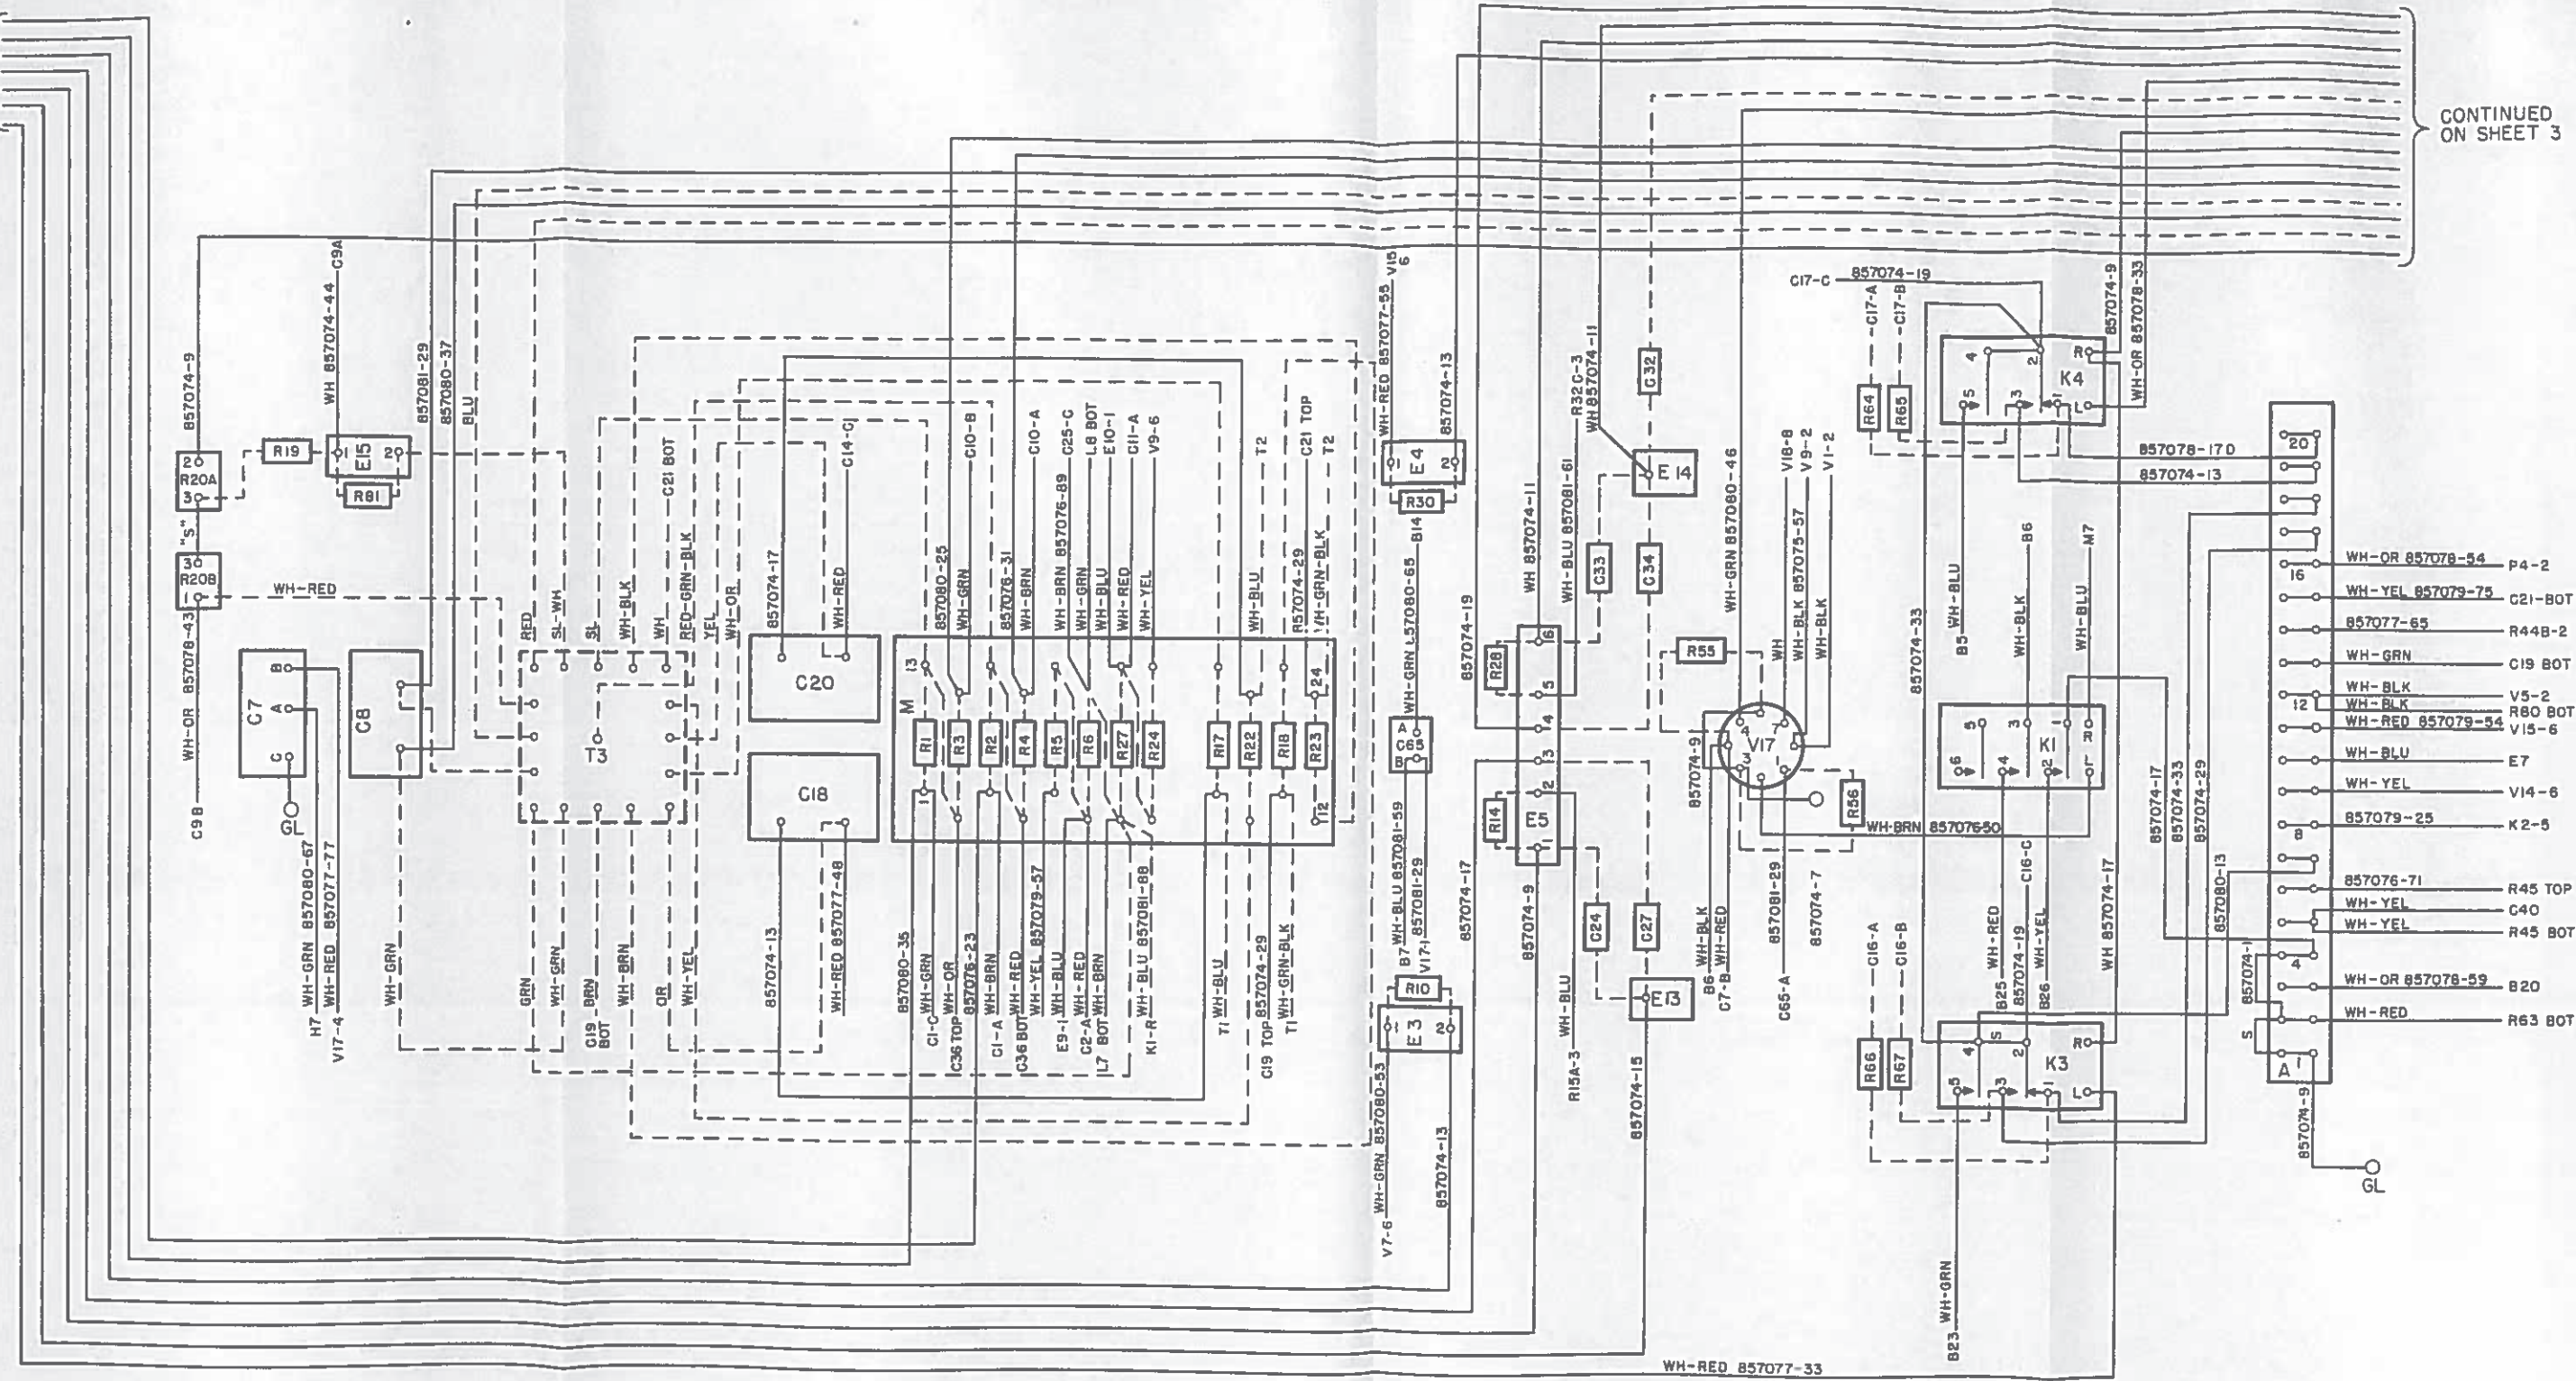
Control Panel Assembled Wiring Diagram (Sheet 2).
